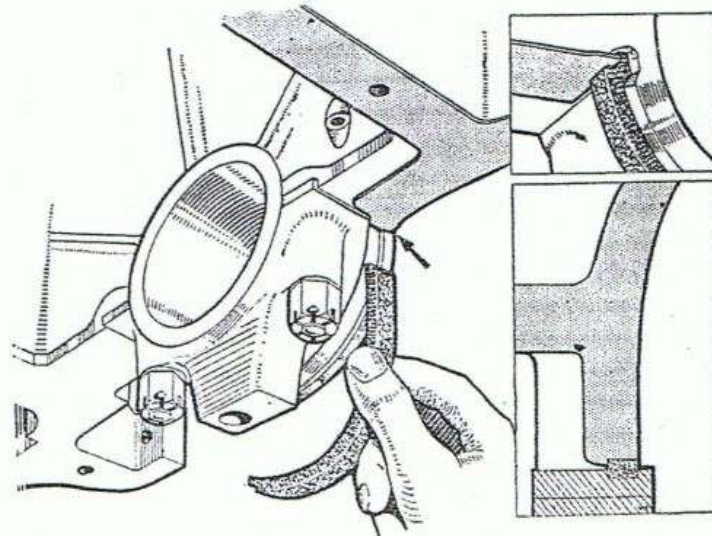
FITTING THE CORK SEAL FOR THE REAR MAIN-BEARING HOUSING.
